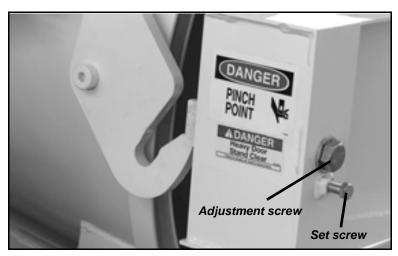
The front of the latch cover has screws for adjusting the latch.
